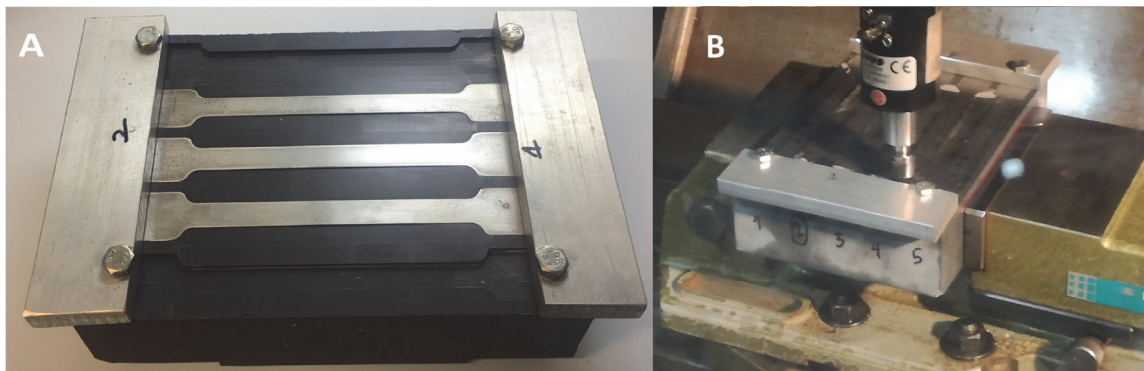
(A) Three tensile specimens fitted in the epoxy equipment. (B) Burnishing tool while treating the specimens.
